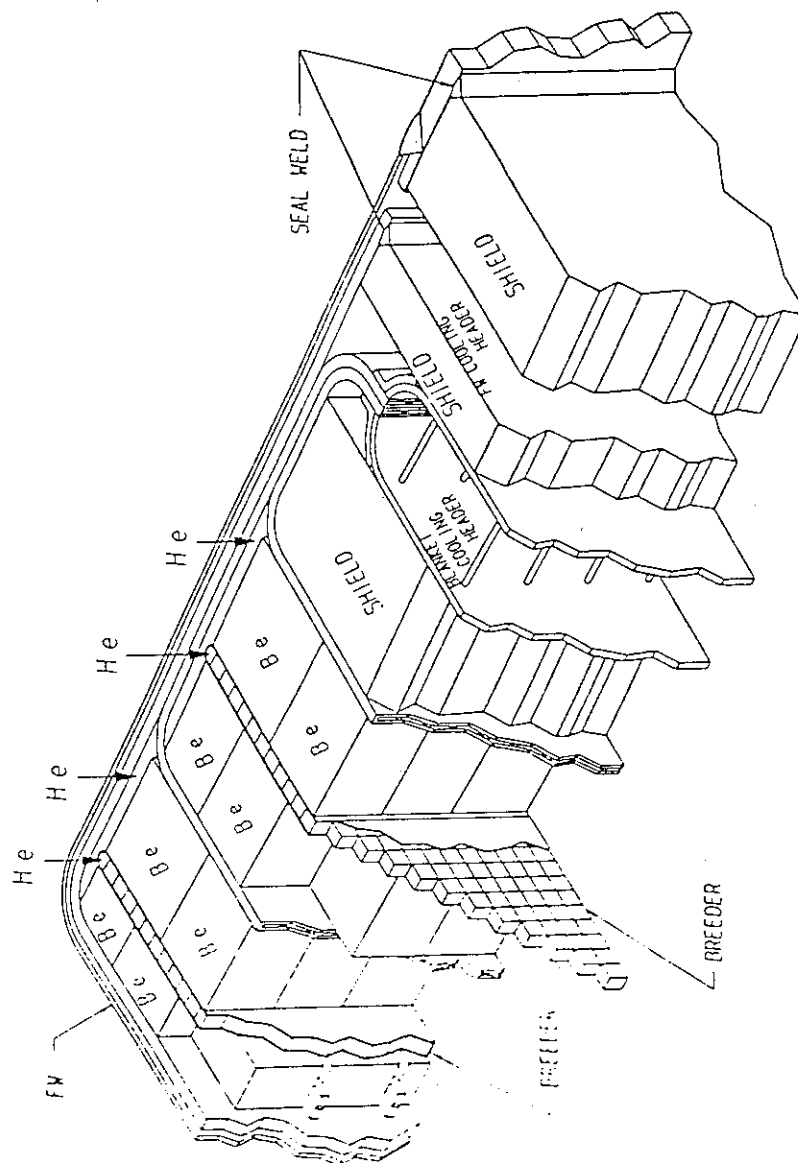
Isometric view of multilayered ceramic breeder blanket design with toroidal cooling and both Li_2O breeder and Be neutron multiplier in the form of sintered blocks
